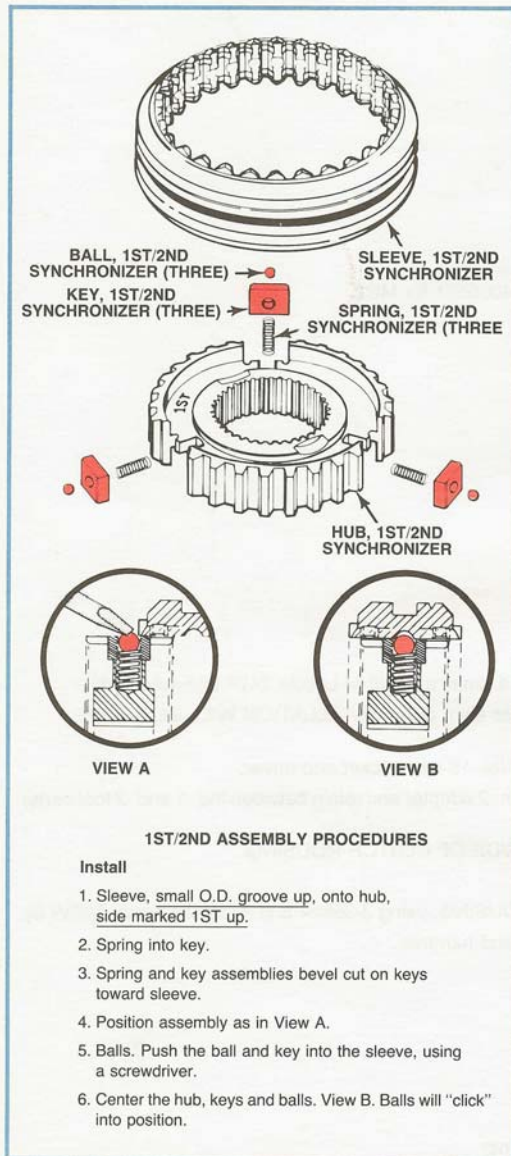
, 1st/2nd Gear Synchronizer Components.
